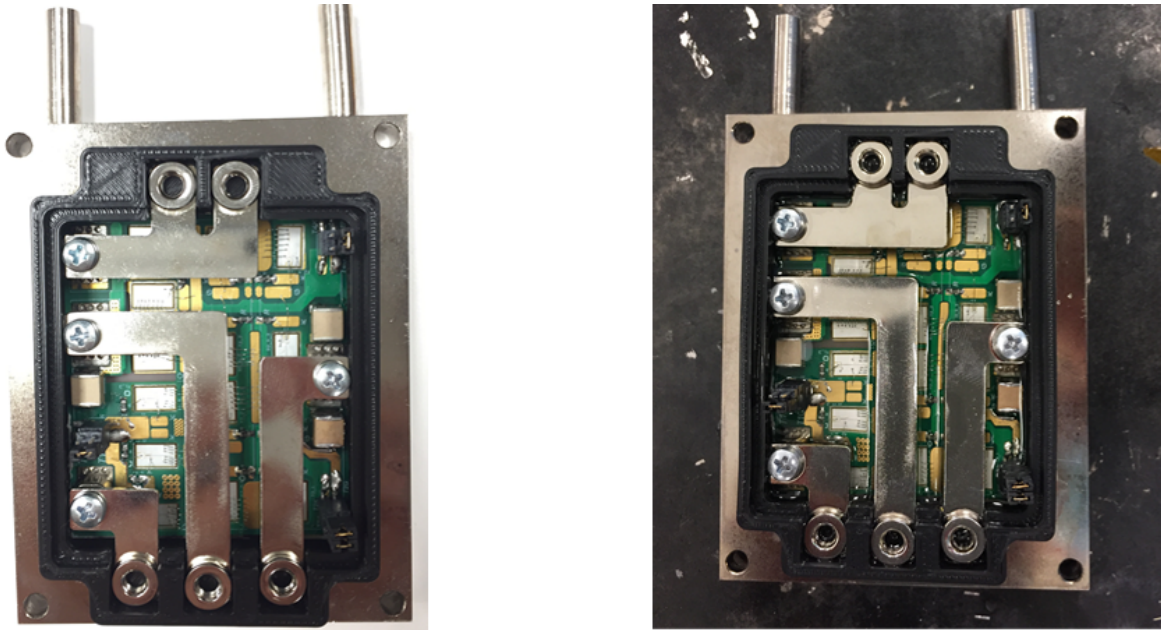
Picture of fabrication process. Step XI (left), housing attachment, terminal installation. Step XII (right), encapsulation.
